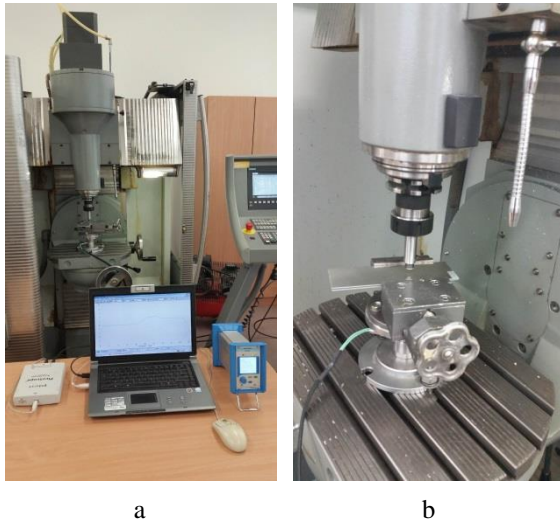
Setup of FSSW experiment: a - overall view of the test-bench; b - clamping – measuring device
